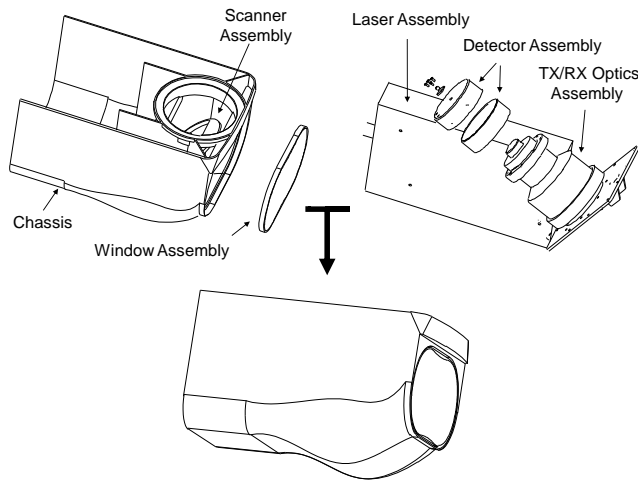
Exploded and assembly views of the LOAM SHU. Adapted from [4].
